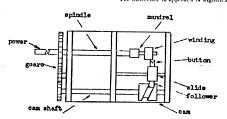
Universal Winding Machine with Cylindrical Cam.
